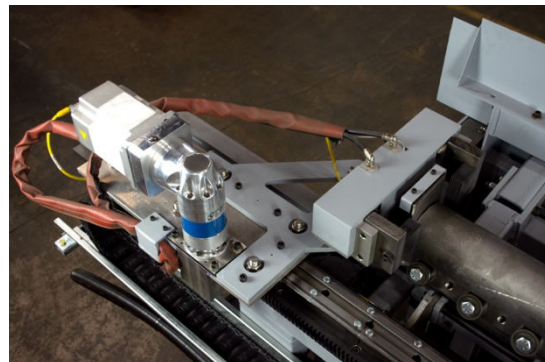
Infeed Conveyor and Pusher/Gripper Assembly
